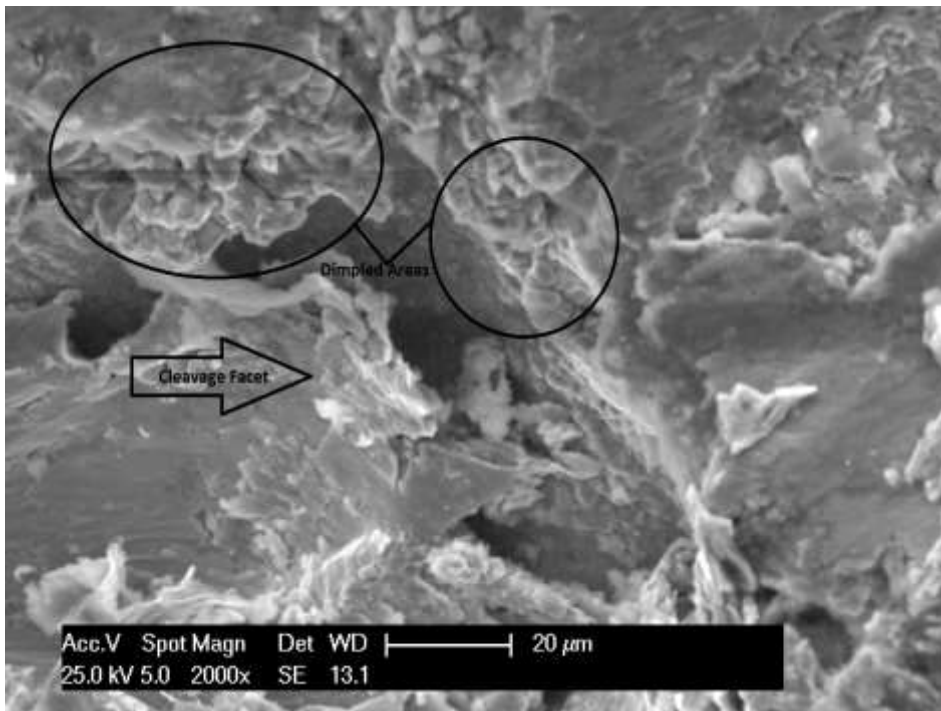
Dimpled areas and cleavage facets of a quasi-brittle fracture in the clad layer of a 420 stainless steel clad sample
